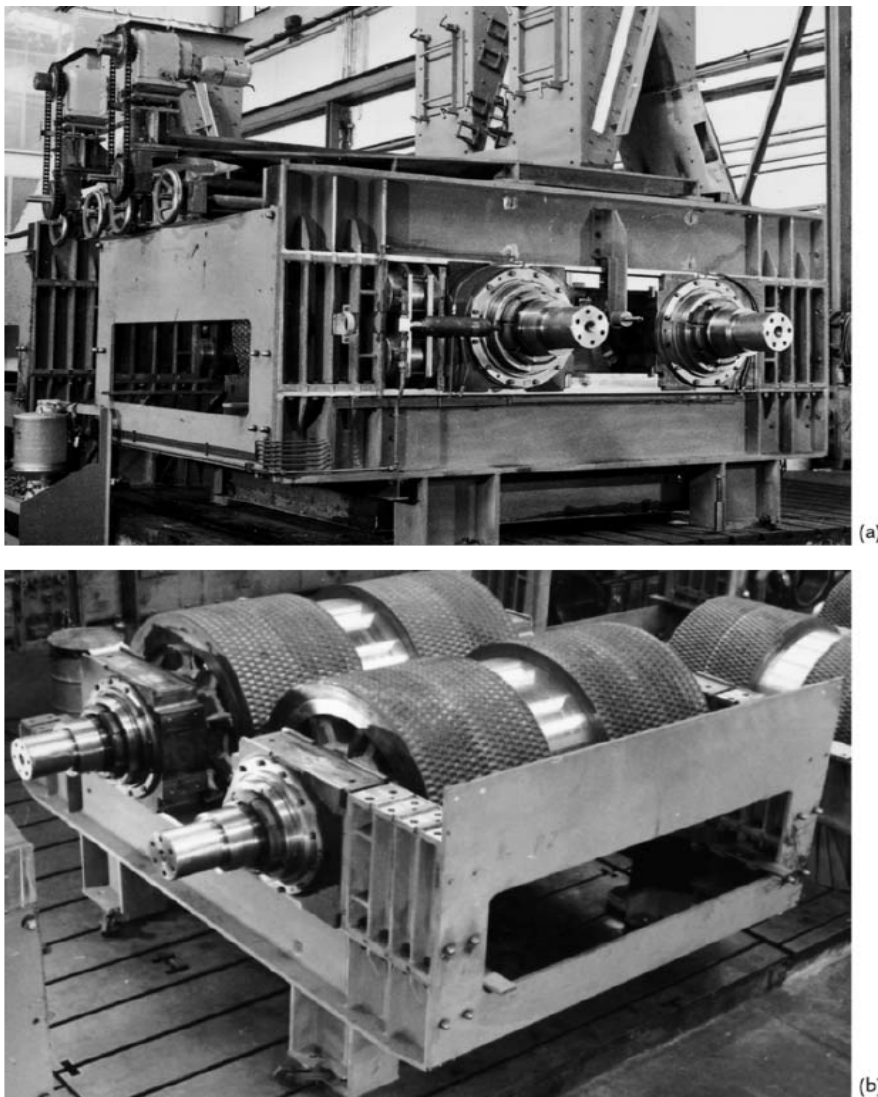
(a) Large briquetting machine for the briquetting of coal, (b) partially assembled roller press showing the two sets of rings (courtesy Koppert, Halting/Ruhr, Germany)[14].
